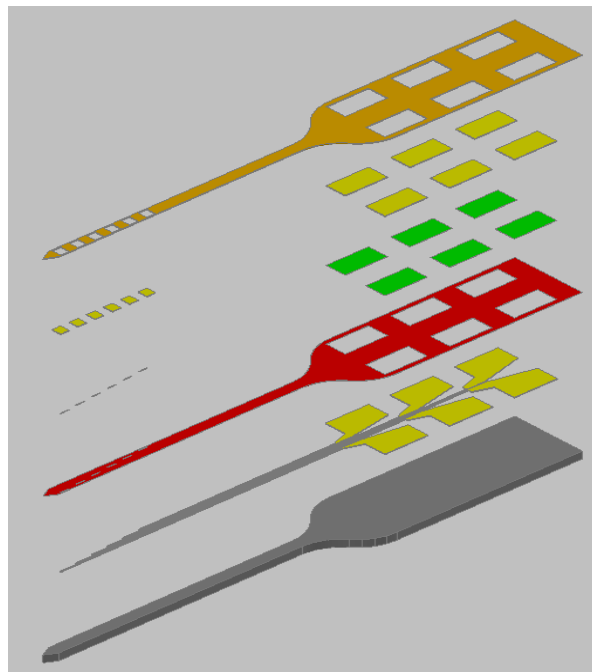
Exploded assembly view of the double metallization layer stimulation electrode
